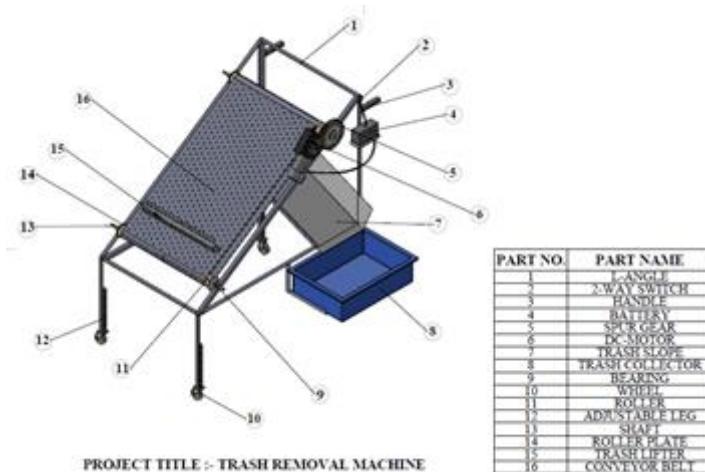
Solid Work Design of Trash Removal Machine in 3-D
